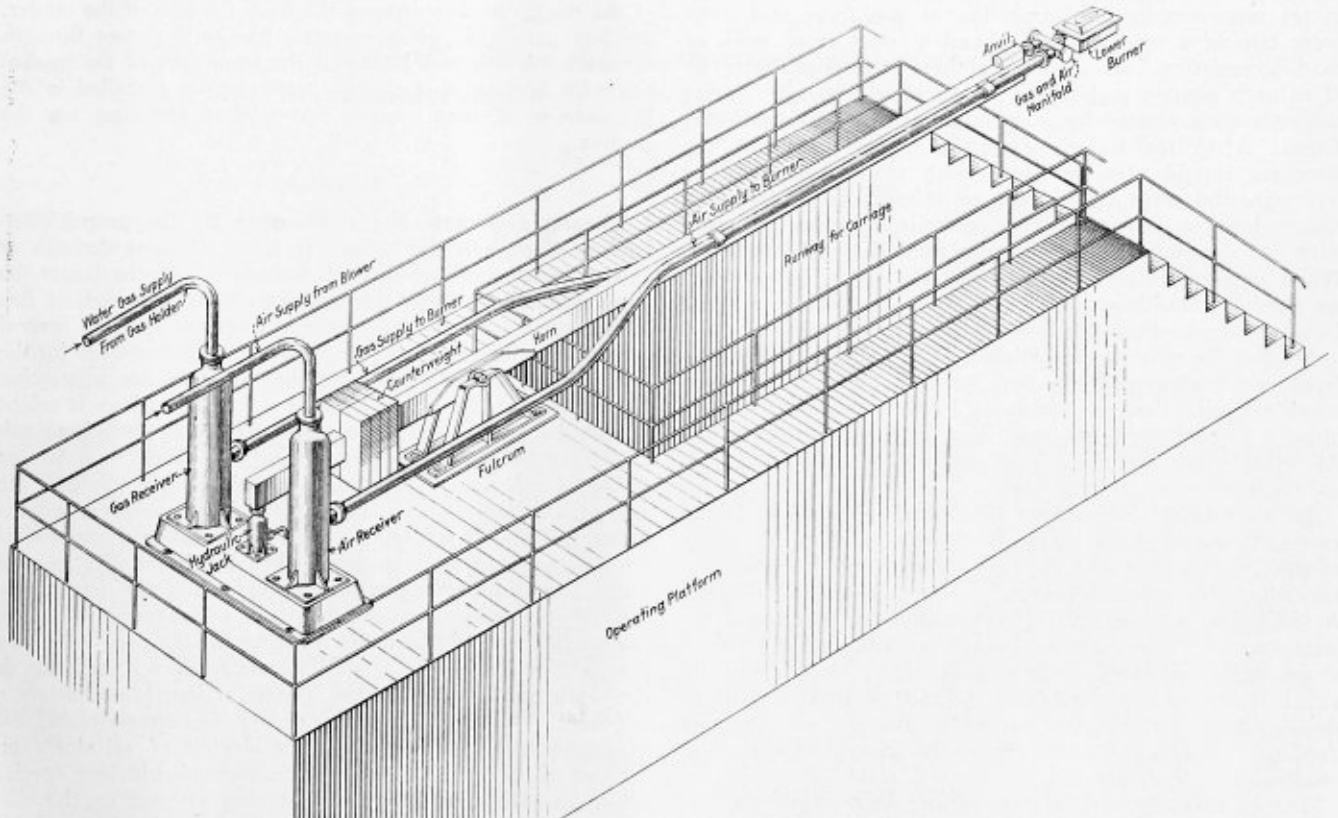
Type of Hammer Welding Machine Used for Welding Boiler Shells and for Tank Work
